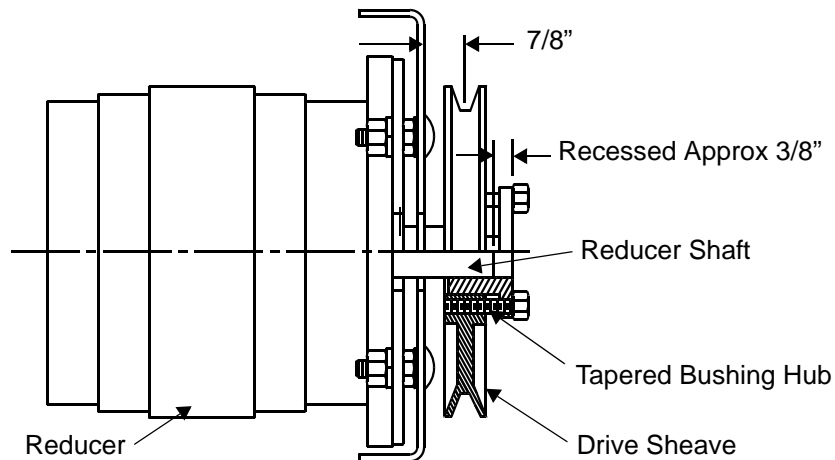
Flange-Mounted Drive Sheave Assembly
